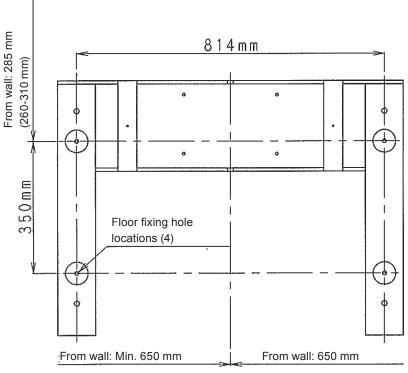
78: Floor fixing hole locations (wide base-mounted)
